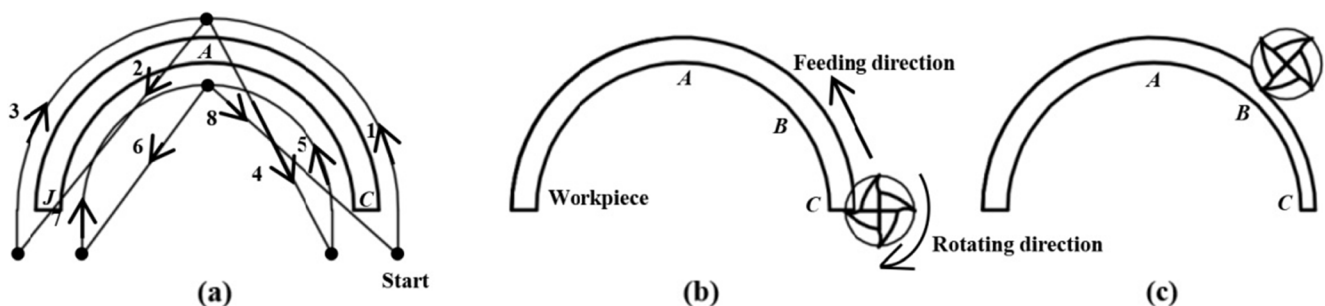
Machining from low rigidity to high rigidity: a tool path, b start position, c machining direction
